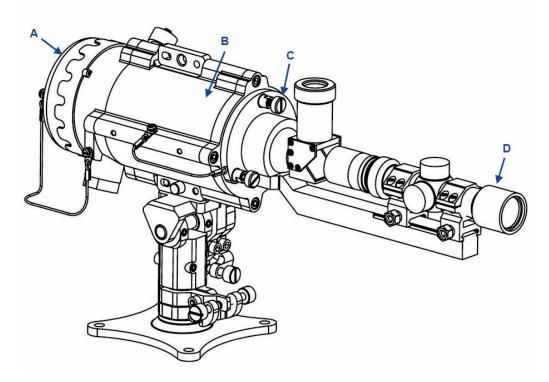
Detector and Tilt Mount Assembly Using Lower Mounting Access
